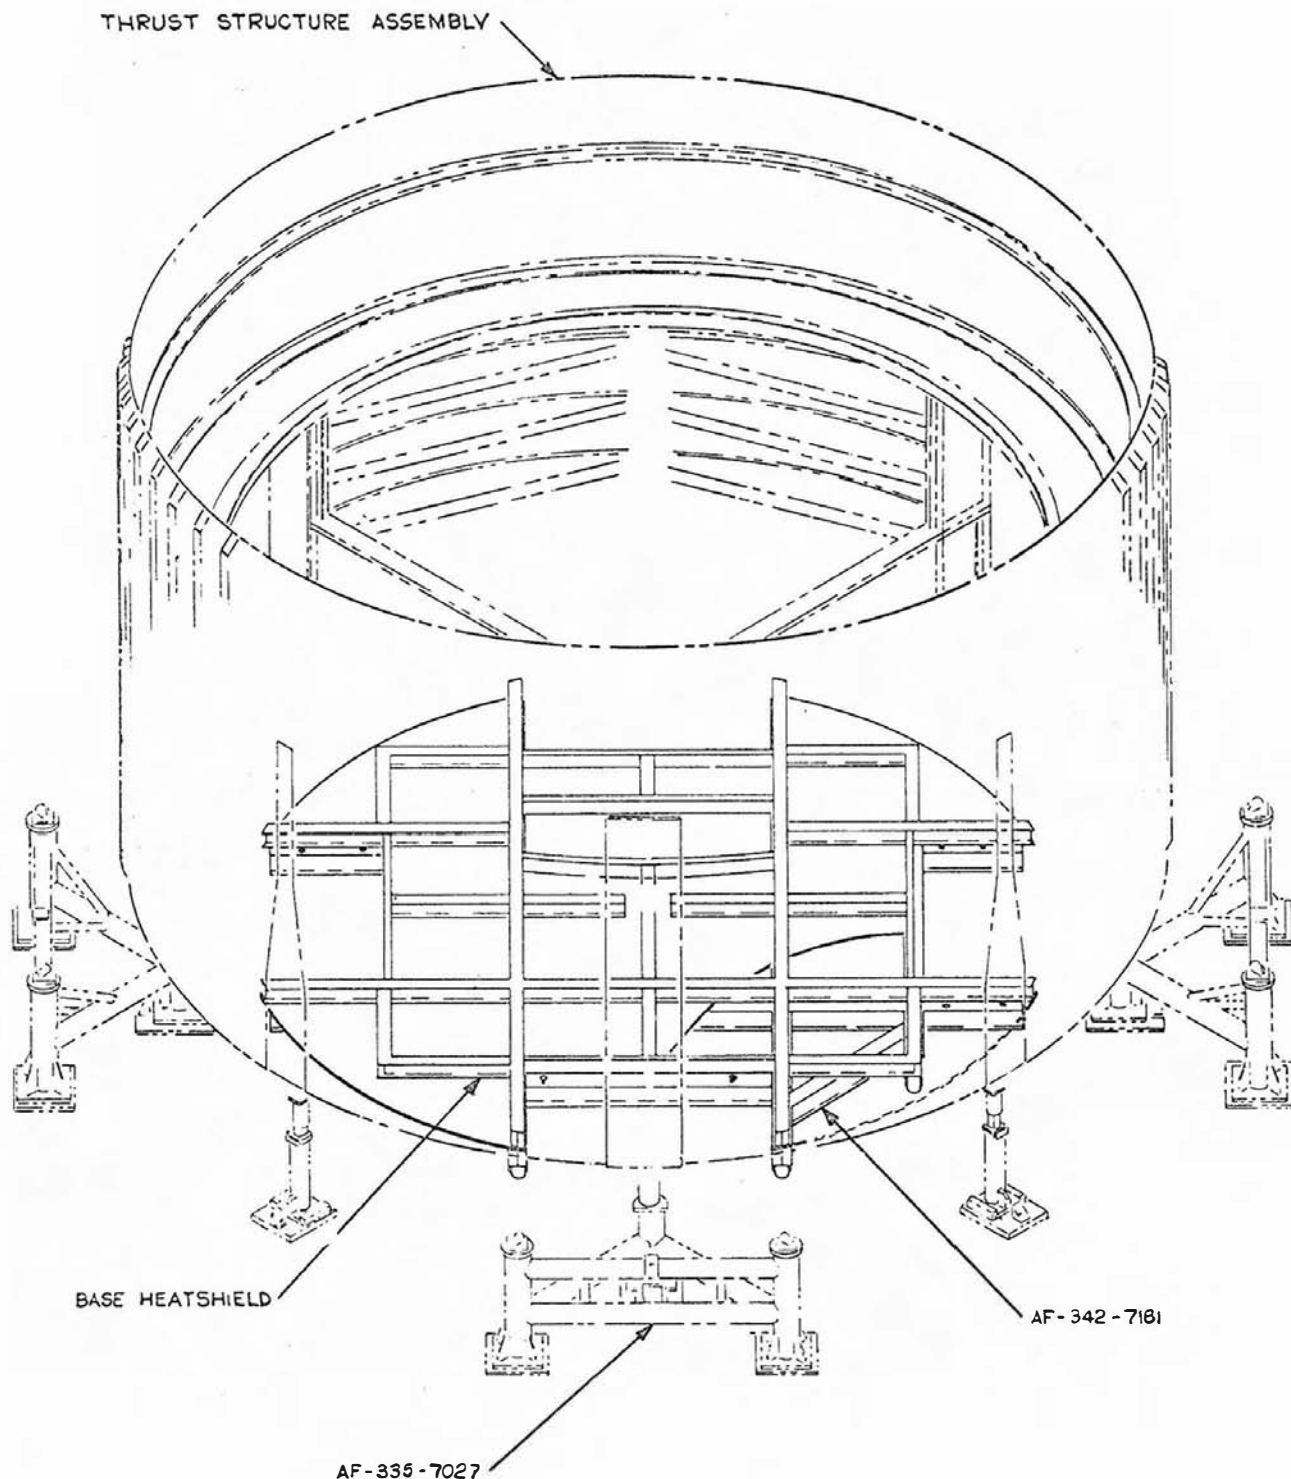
16. Reassembly of Base Heatshield Structure 60B20100
